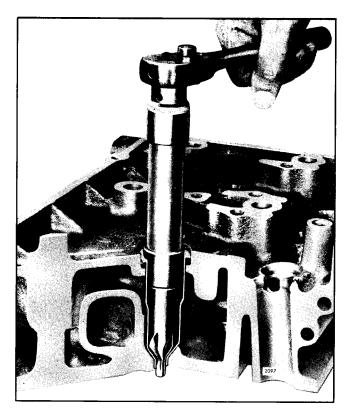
· Reaming Injector Tube for Injector Nut using Tool J 5286-9
